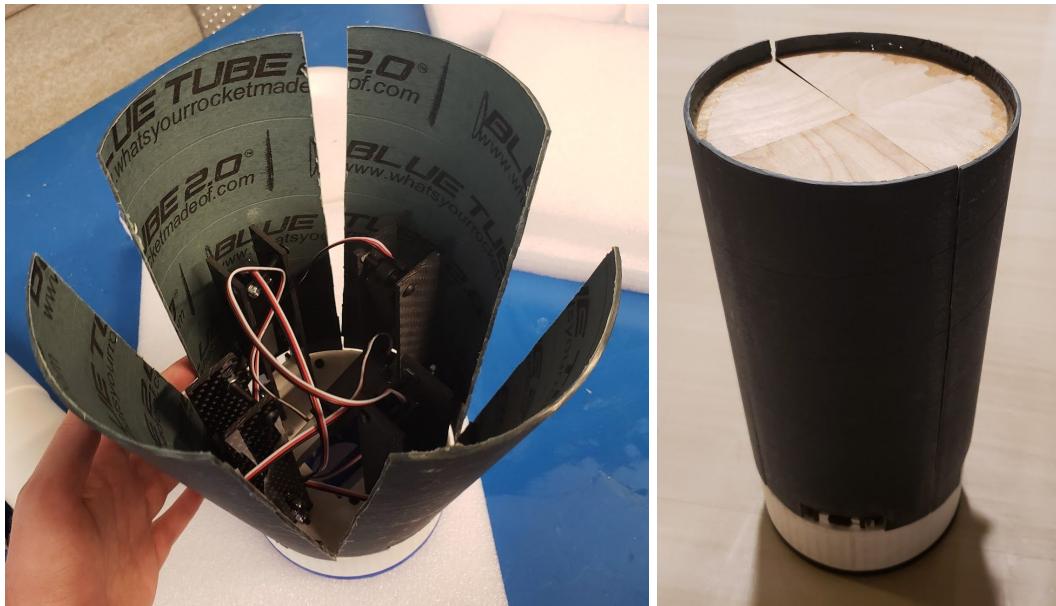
Construction of Retention System (Left) and Completed Retention System (Right)
